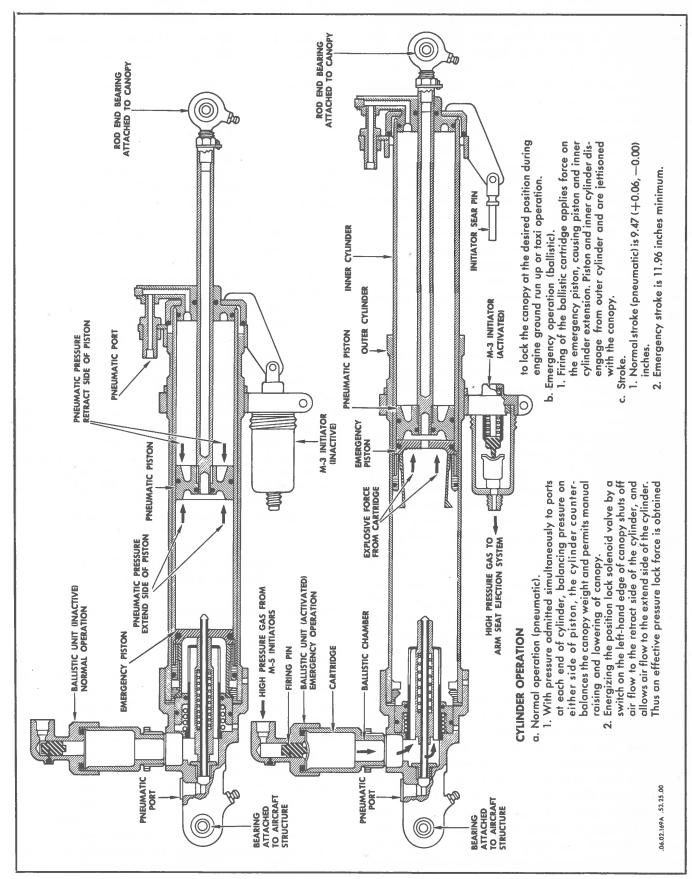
Pneumatic Canopy Actuating Cylinder, F-106A Applicable to 56-453 thru 57-243 prior to incorporation of TCTO 1F-106J-525
